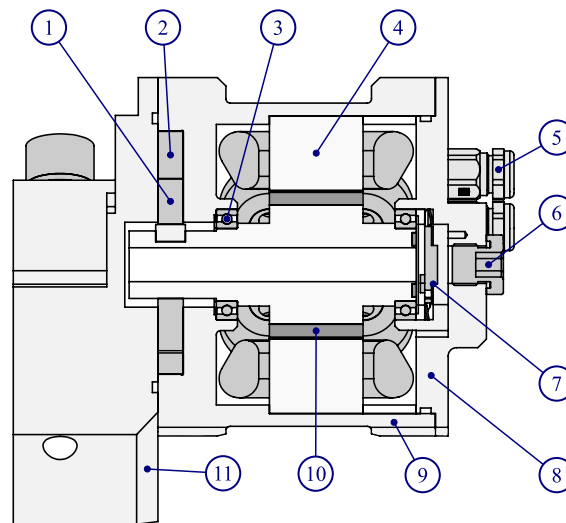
Electro-hydrostatic damper actuation unit. (1) gerotor inner gear; (2) gerotor outer gear; (3) motor ball bearing [$\times 2$]; (4) stator assembly; (5) cable gland [$\times 4$]; (6) drain cap; (7) position sensor; (8) motor cover; (9) casing; (10) rotor assembly; (11) manifold.
